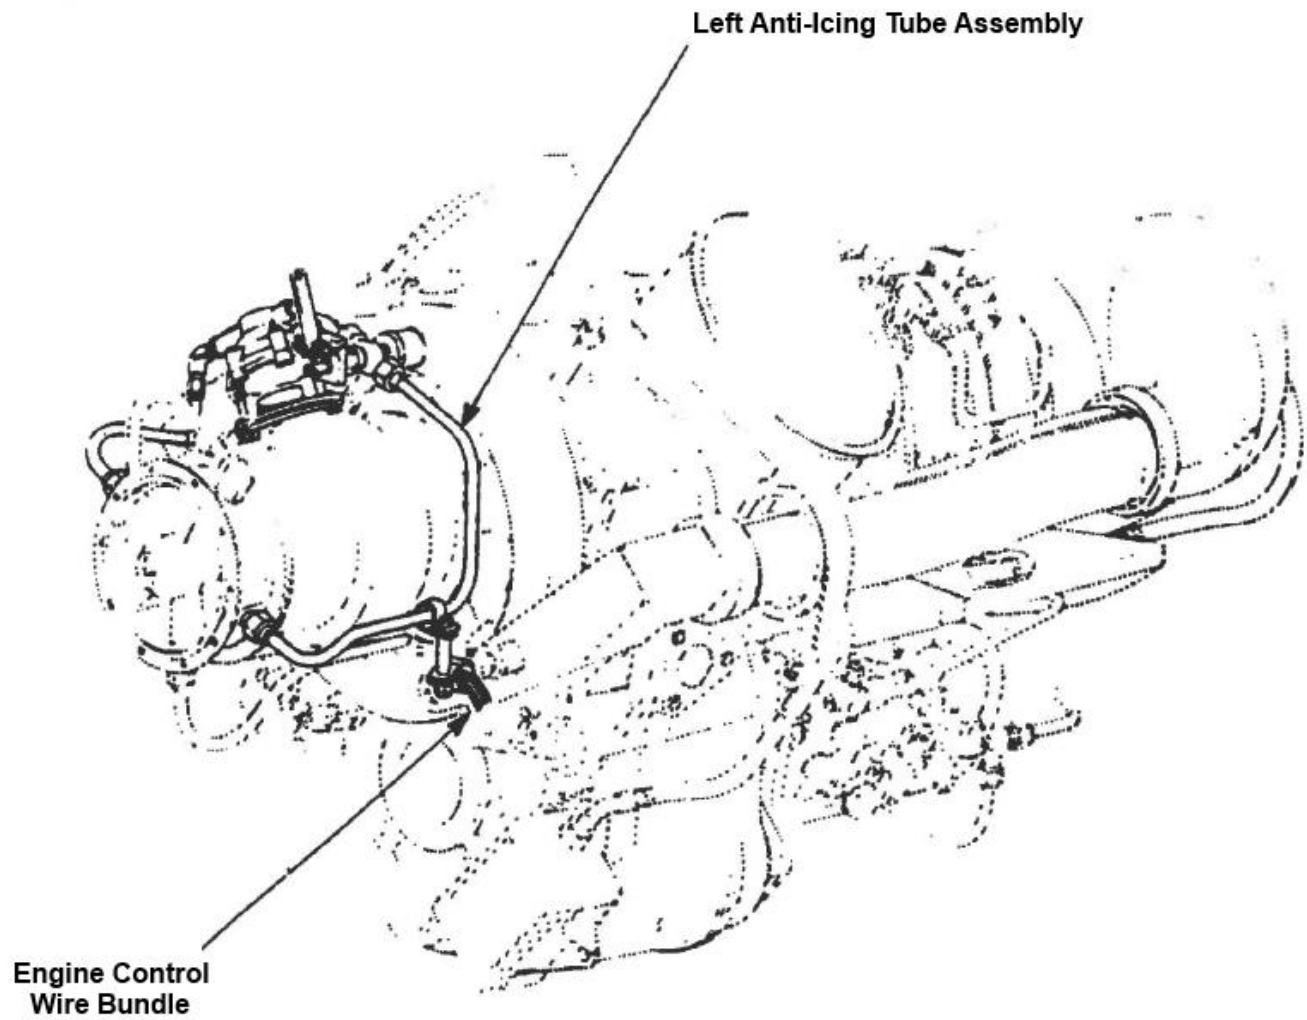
Optimum Location of Engine Control Wire Bundle on Left Anti-Icing Tube Assembly
